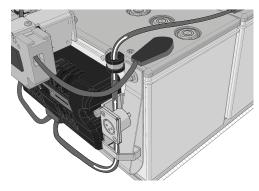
Attach the cable that is connected to the front battery's right terminal in its cable holder as shown.
